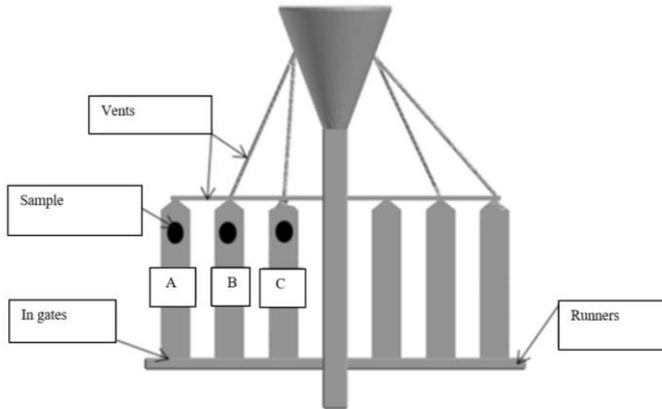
Sampling regions and wax pattern mold CAD file. (A = 2 mm; B = 0.7 mm; C= 1.5 mm plate
